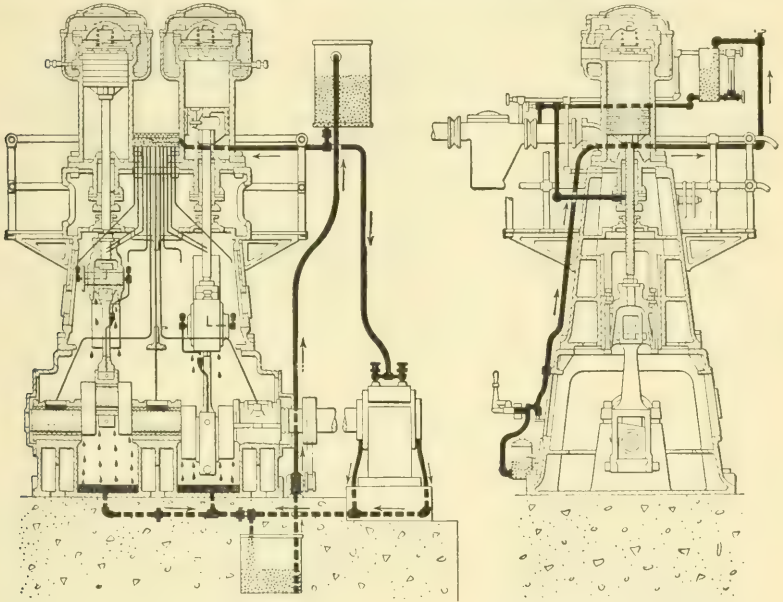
Lubrication; the Vertical, Open Frame, Compressor.
